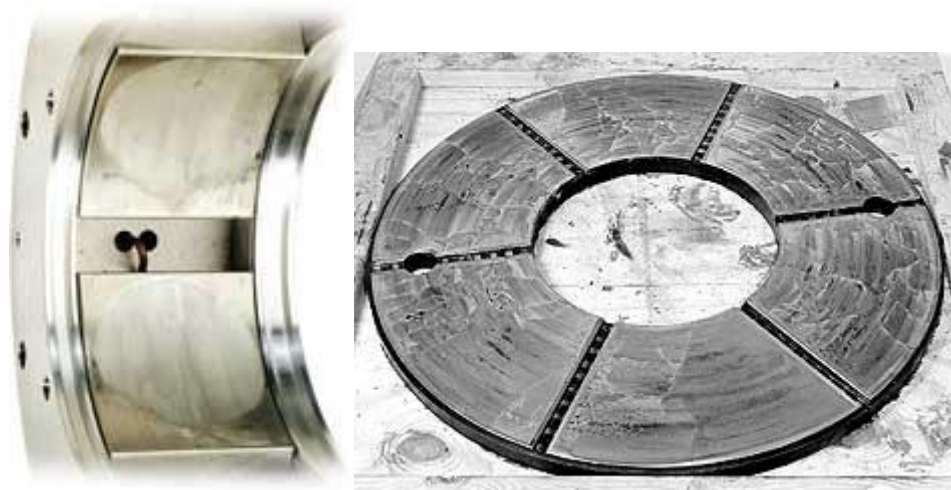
Example of damage to pad due to 'whipping' and 'flaking' [29]
